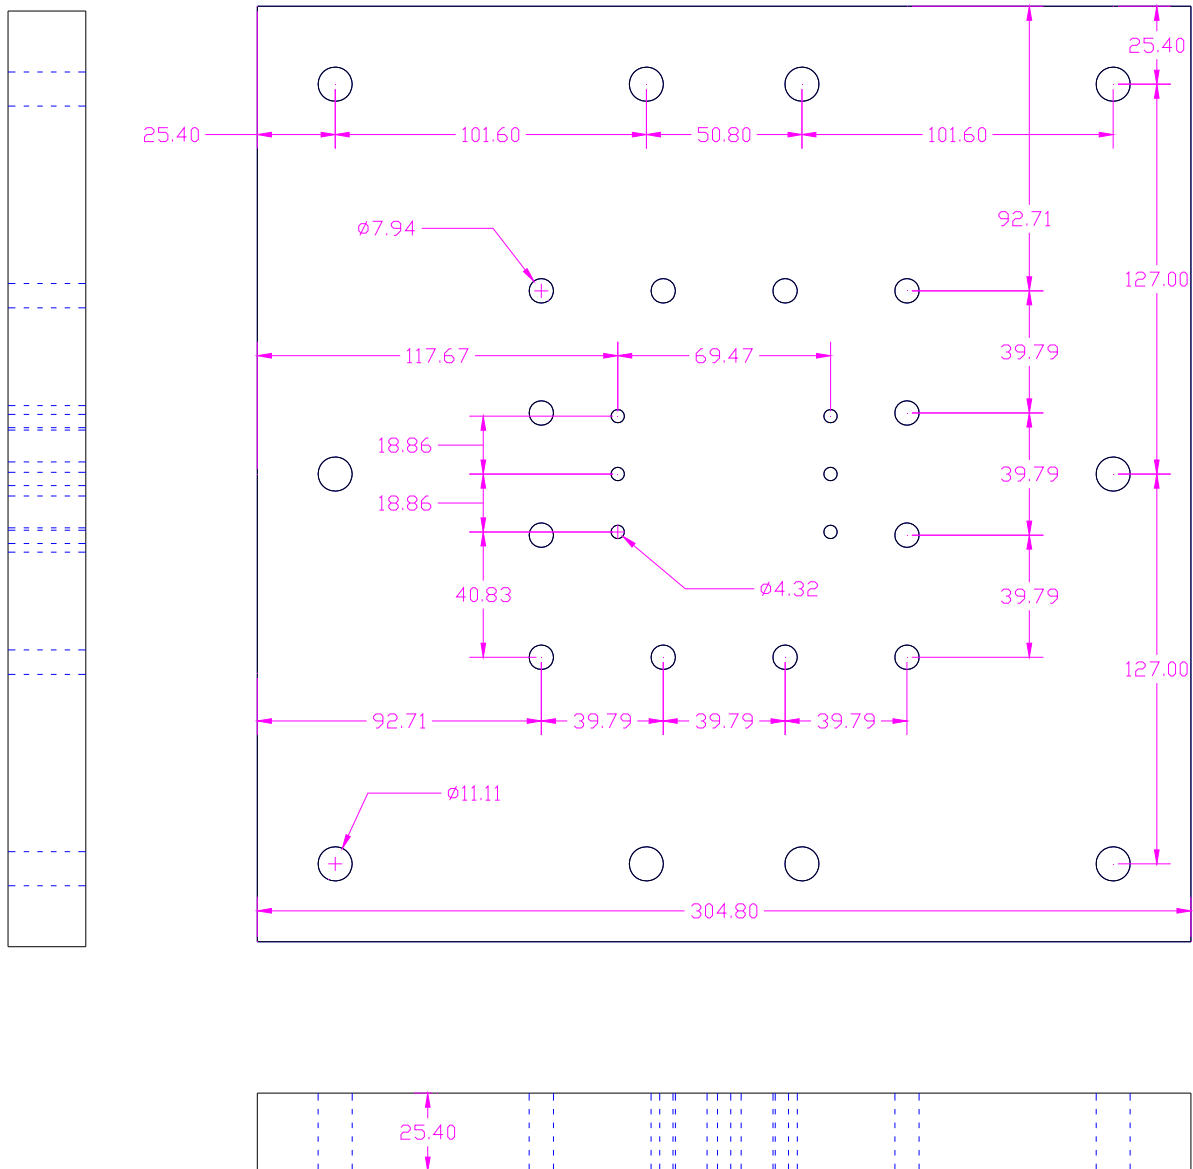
Design drawing for part #7, a total of one piece (all values are in mm)
